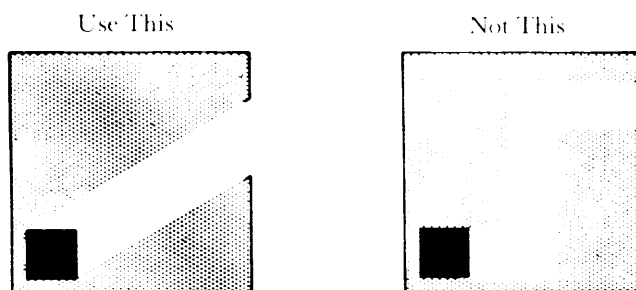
Example of Access to Permit Easy Removal of Component (Ref. 3)
